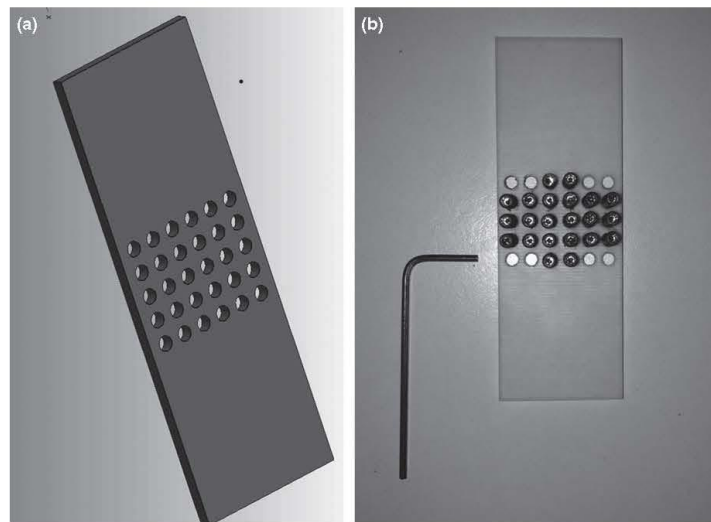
The 'tissue press'. Lateral (a, drawing) and frontal (b) view of the device.
